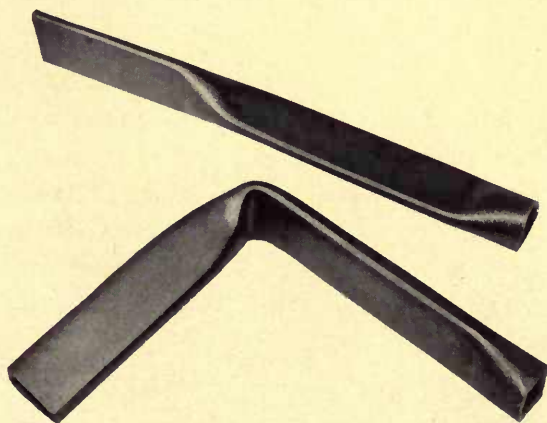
Bridgeport Plumrite Brass Pipe may be bent or hammered cold without cracking.
